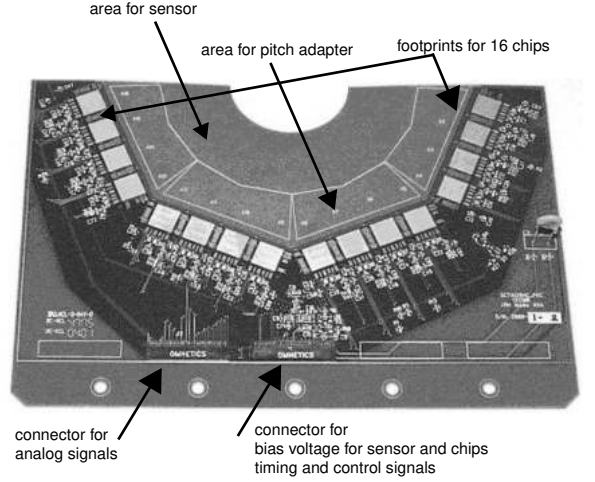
Photograph of a prototype PCB-hybrid for SCT128A chip.
